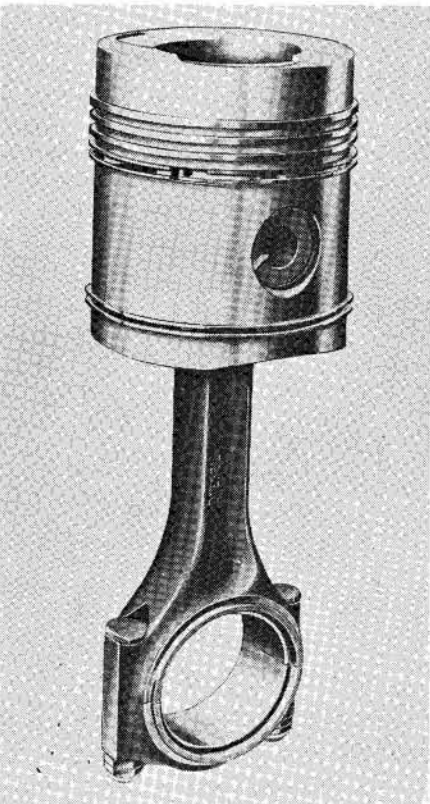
When reassembling piston to the connecting rod, be sure valve recesses in piston head are to same side of assembly as crankpin bearing insert tang notches in rod.
